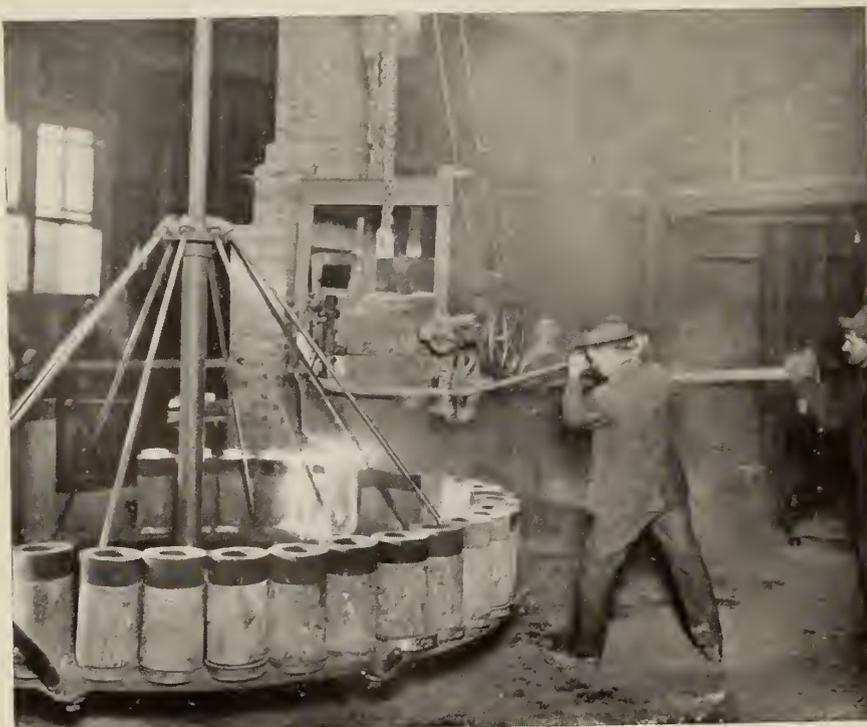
CASTING 4.5 SHELL BILLETS IN INGOT MOLDS.
